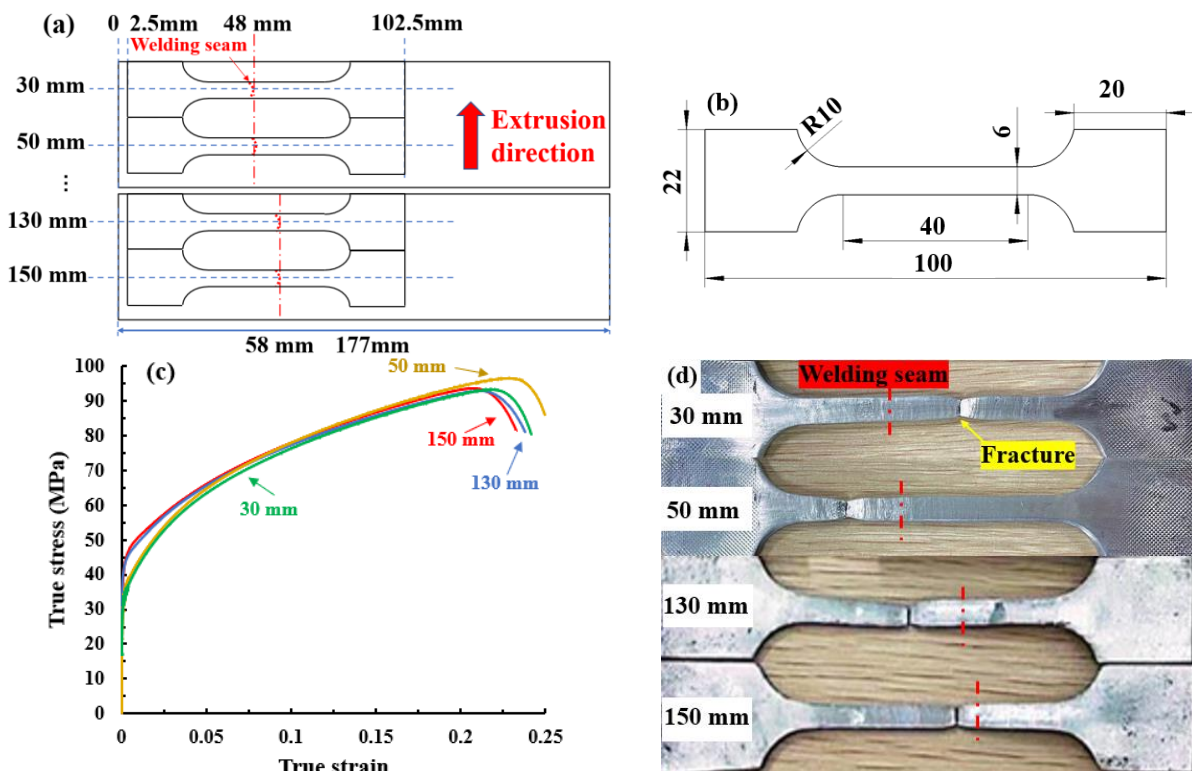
Tensile testing specimens and testing results of AA1060, showing (a) sampling positions taken from 30, 50, 130 and 150 mm to the front end, (b) geometry and dimensions, (c) good mechanical properties and (d) tested specimens.
